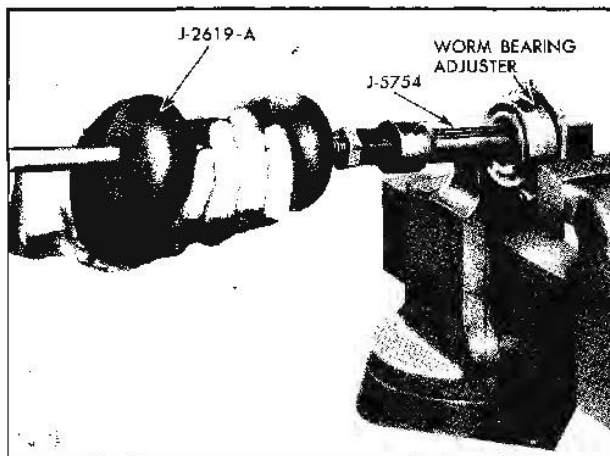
Removing Bearing Cup from Worm Bearing Adjuster
